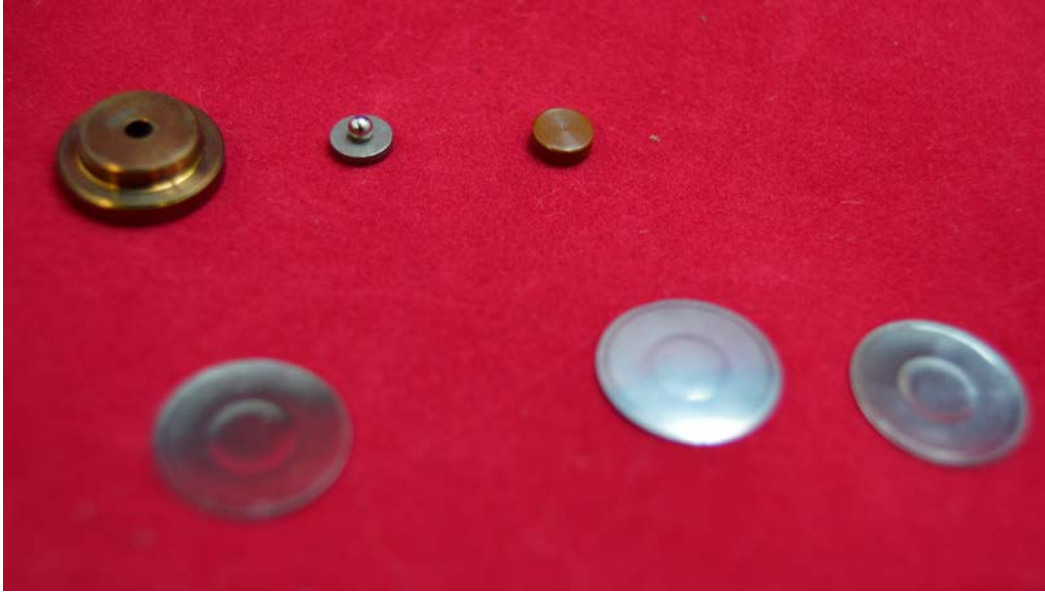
Photographs of Burst Tested Valve Inner Components
